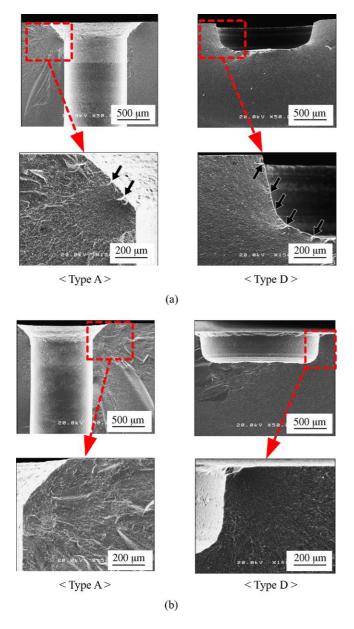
SEM photomicrographs of fracture surface. The arrow symbols indicate that the surface micro-crack formed during machining: (a) as-machined specimen (before crack-healing) and (b) crack-healed specimen (after crack-healing).
